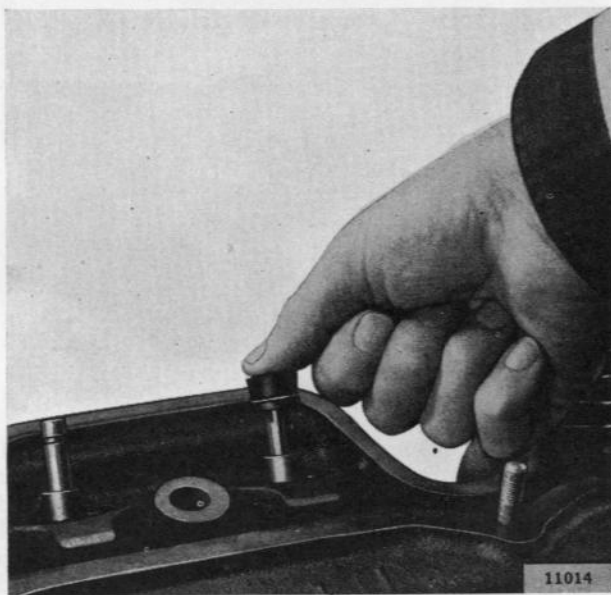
STARTING VALVE GUIDE SEAL ON VALVE STEM
